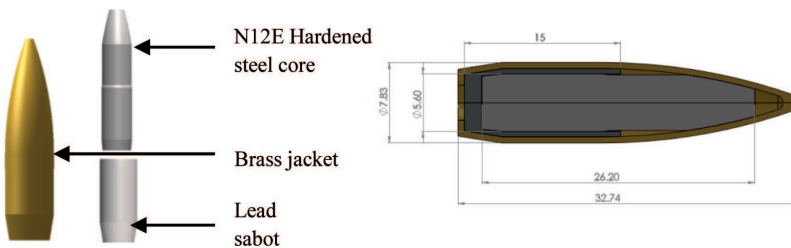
Schematic drawing geometry of 7.62 mm AP bullet
